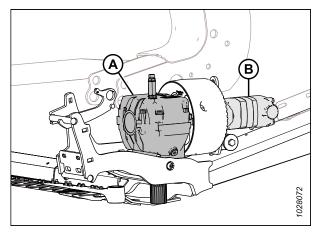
Left Knife Drive Box Shown – Right Similar
